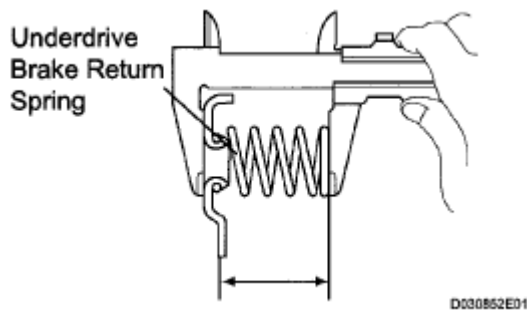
Measuring Free Length Of Underdrive Brake Return Spring
